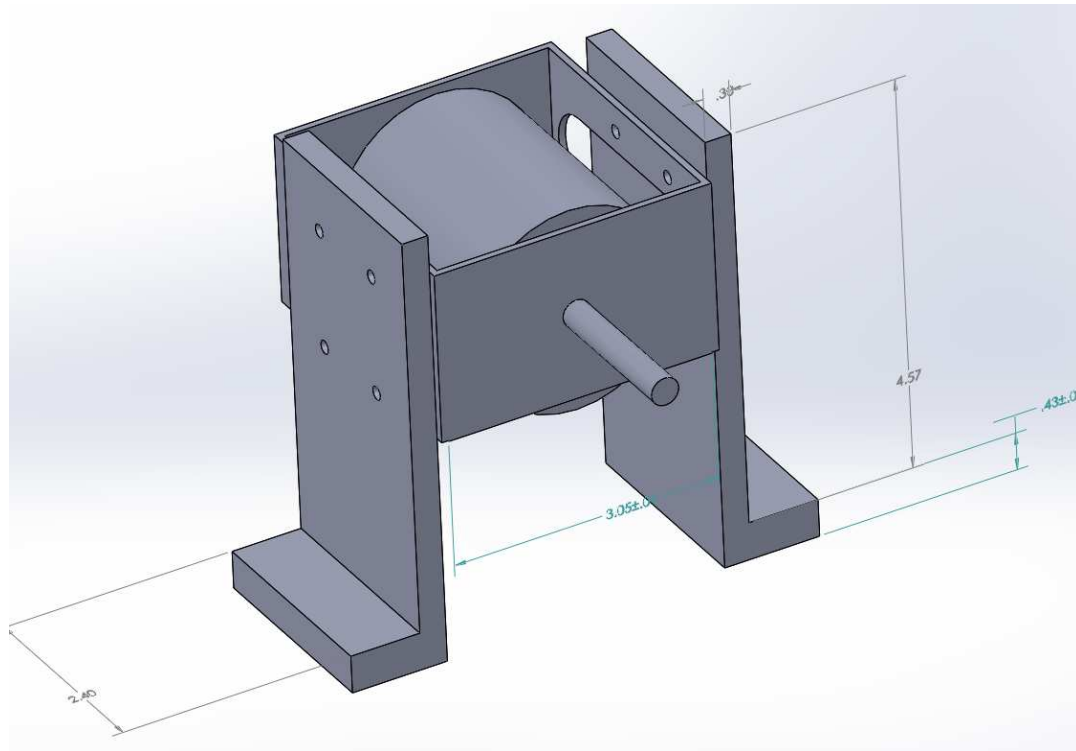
22: The 3D CAD drawing of the motor mount with the dimension displayed. The unit is measured in inches.
